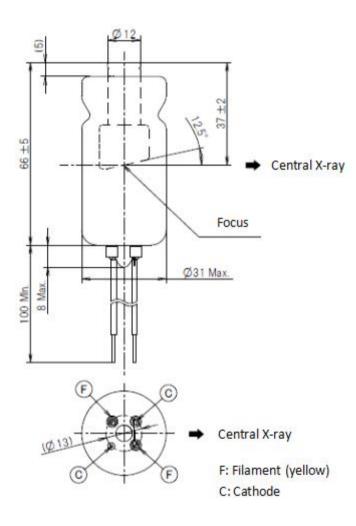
Mechanical Dimensions and Wiring Diagrams
